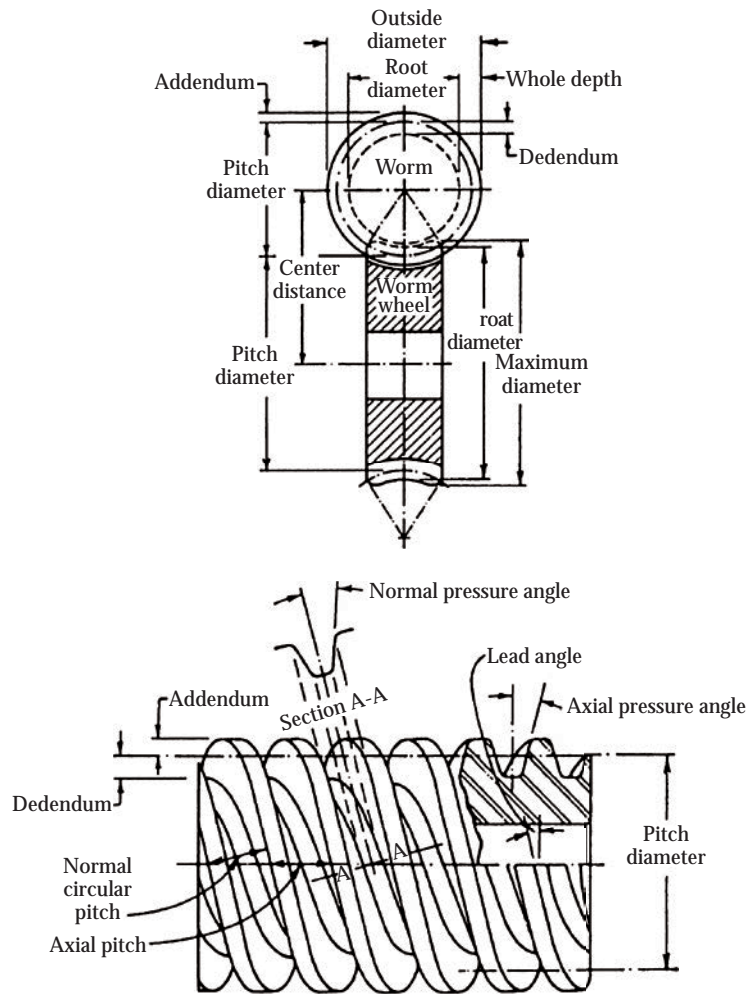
Cylindrical worm gear nomenclature. OD: outside diameter.
